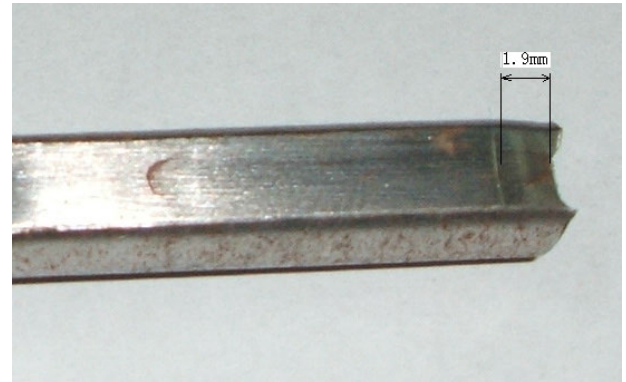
Fretting fatigue sample fracture position diagram.
